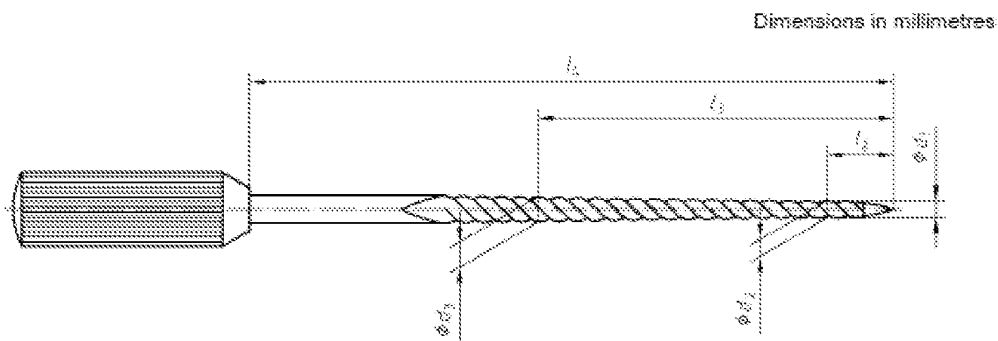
Type 1: Standard-sized instrument: taper = 2 % — Dimensions, locations
